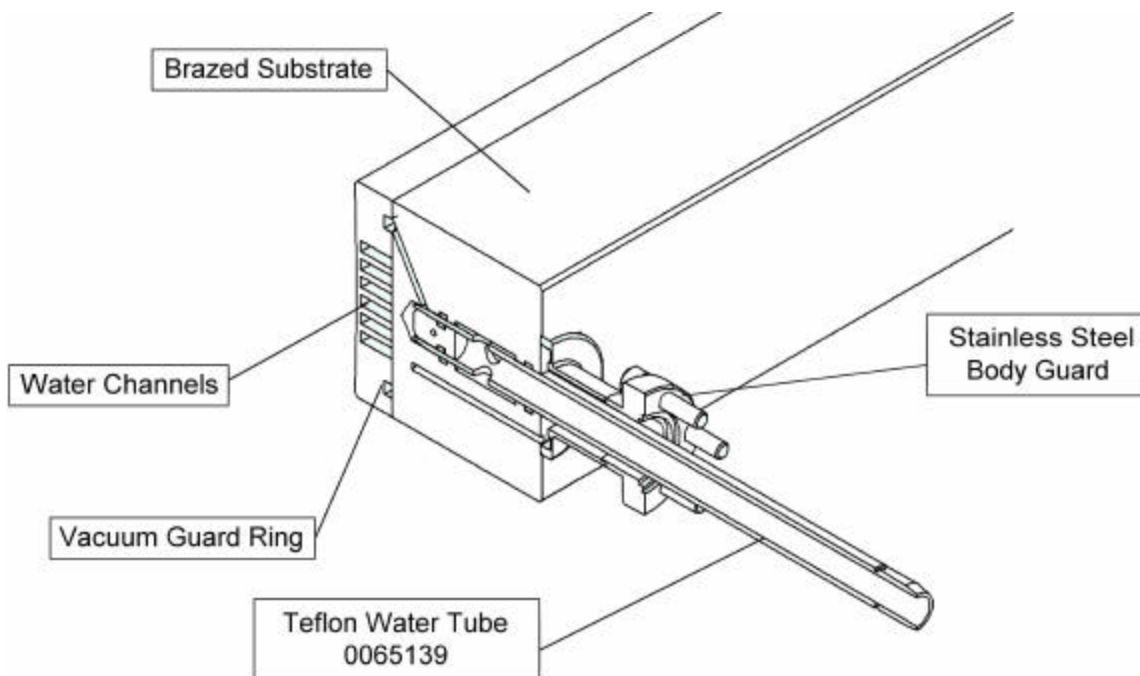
The mirror assembly sectioned along the water supply line. The kinematical mounting points (3) are on the bottom of the main mirror body but not shown.
